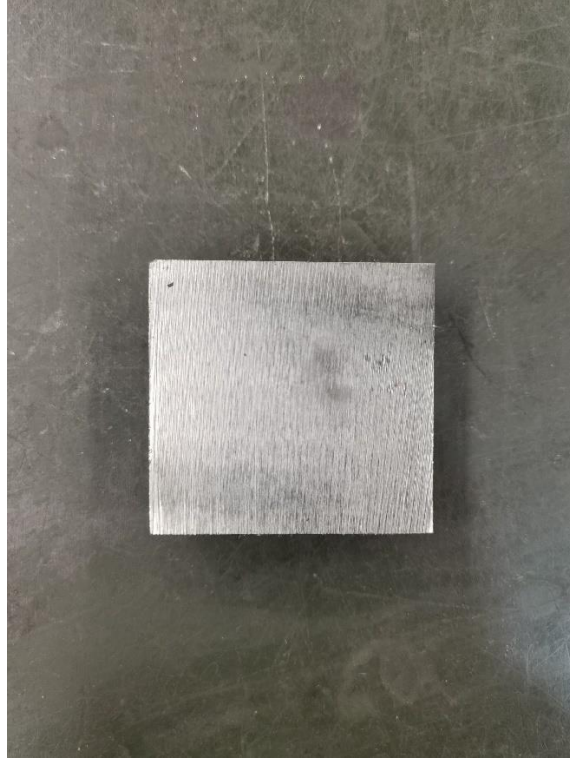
Dimension by 40x40x10 mm AISI S7 steel
